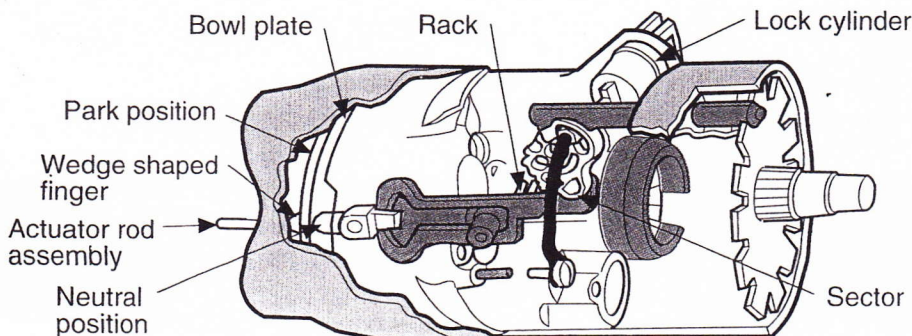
Mechanical linkage used to prevent starting the engine while the transmission is in gear. Courtesy of Cadillac Motor Car Division, General Motors Corporation
